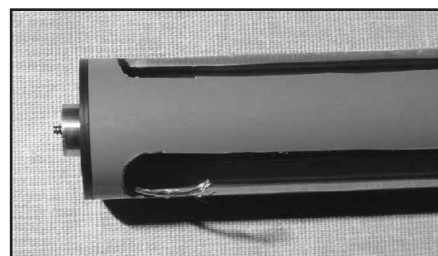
The bottom end of the rotor. The base plate is held in place by friction.
